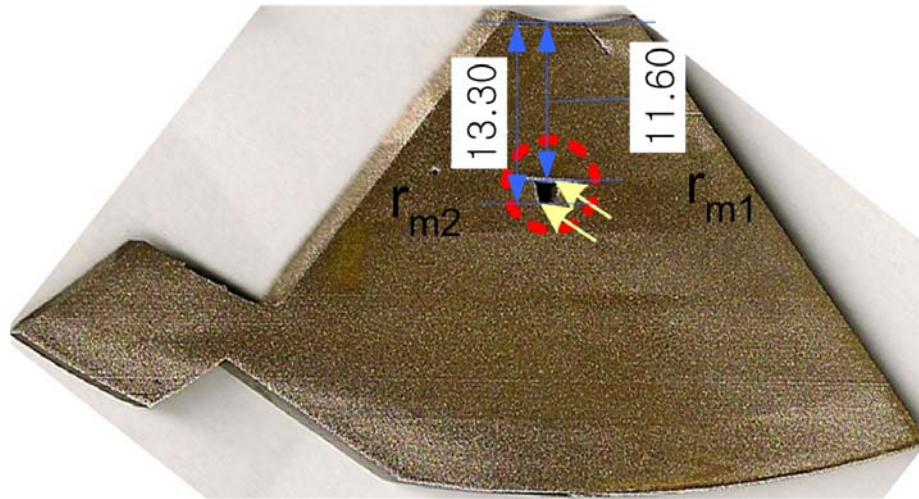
Flaw #3A I.D. Notch on Carbon Steel Plate
